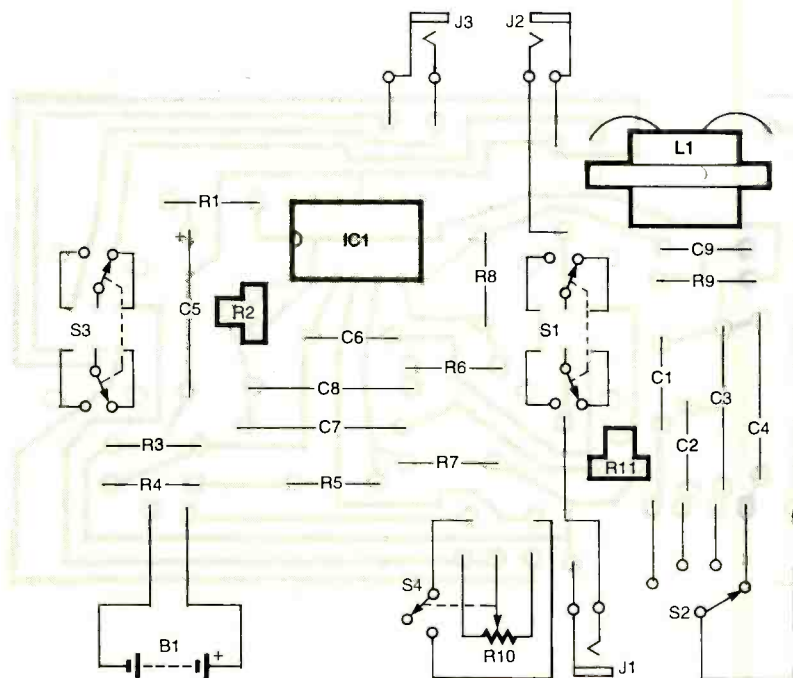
The Wild Mouse is simple enough to be laid out on a single-sided board without the need for jumpers.
